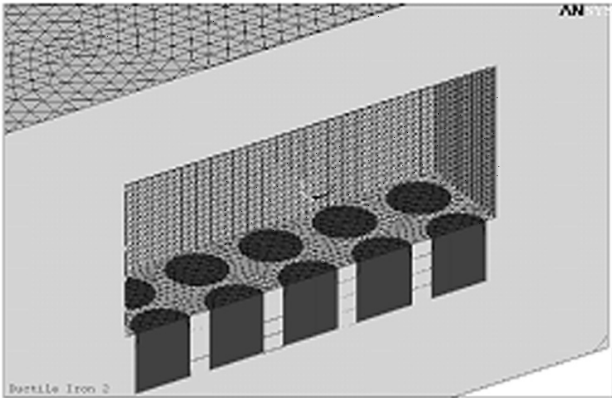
A detailed view of the mesh inside the chills and mold for casting no. 1
